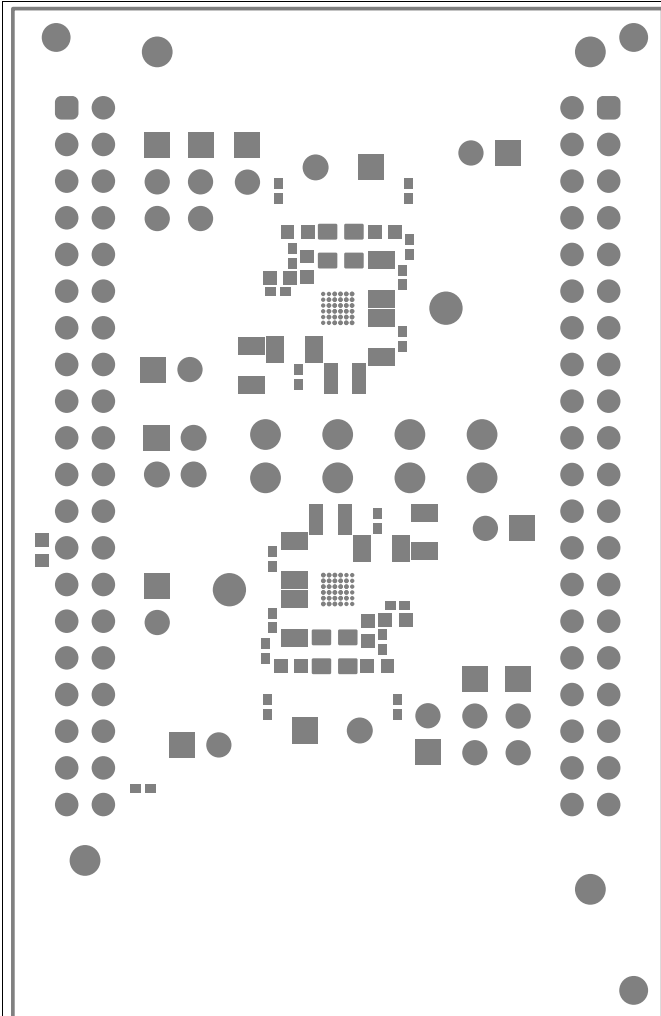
TAS2562YFPEVM-DC Top Solder Mask
